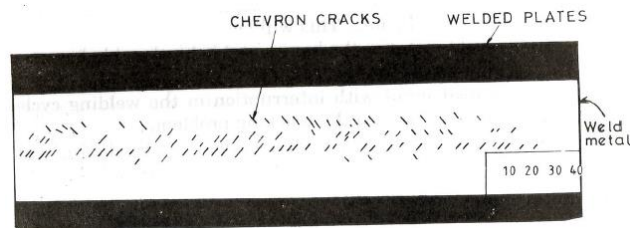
Representation of Chevron cracks on a submerged arc welded sample [50]
